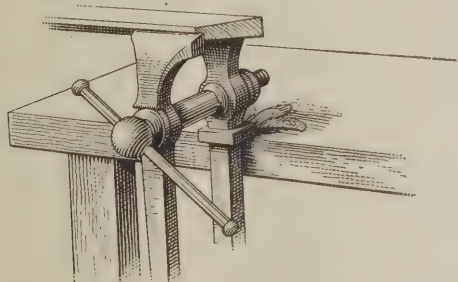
Showing How the Molding is Gripped in the Jaws of the Vise.
